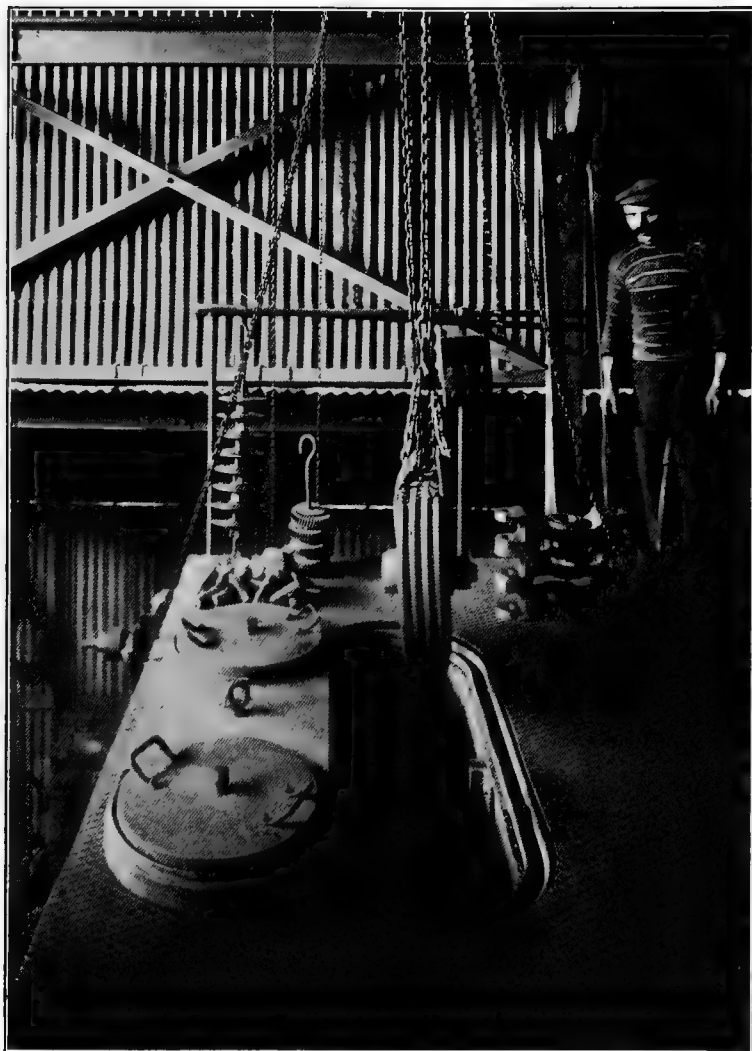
Charging Furnace of Type shown in Fig. 9.
